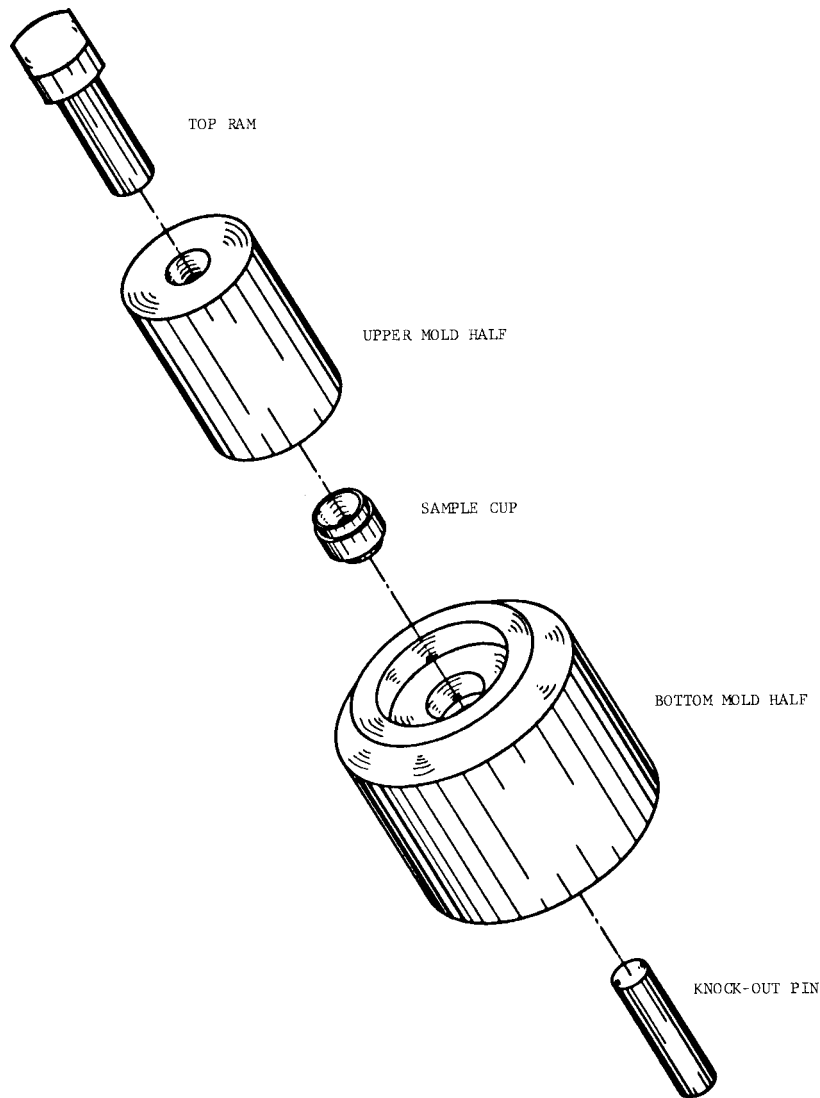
Assembly of Mold for Pressure Molding Pitch into a Sample Cup
